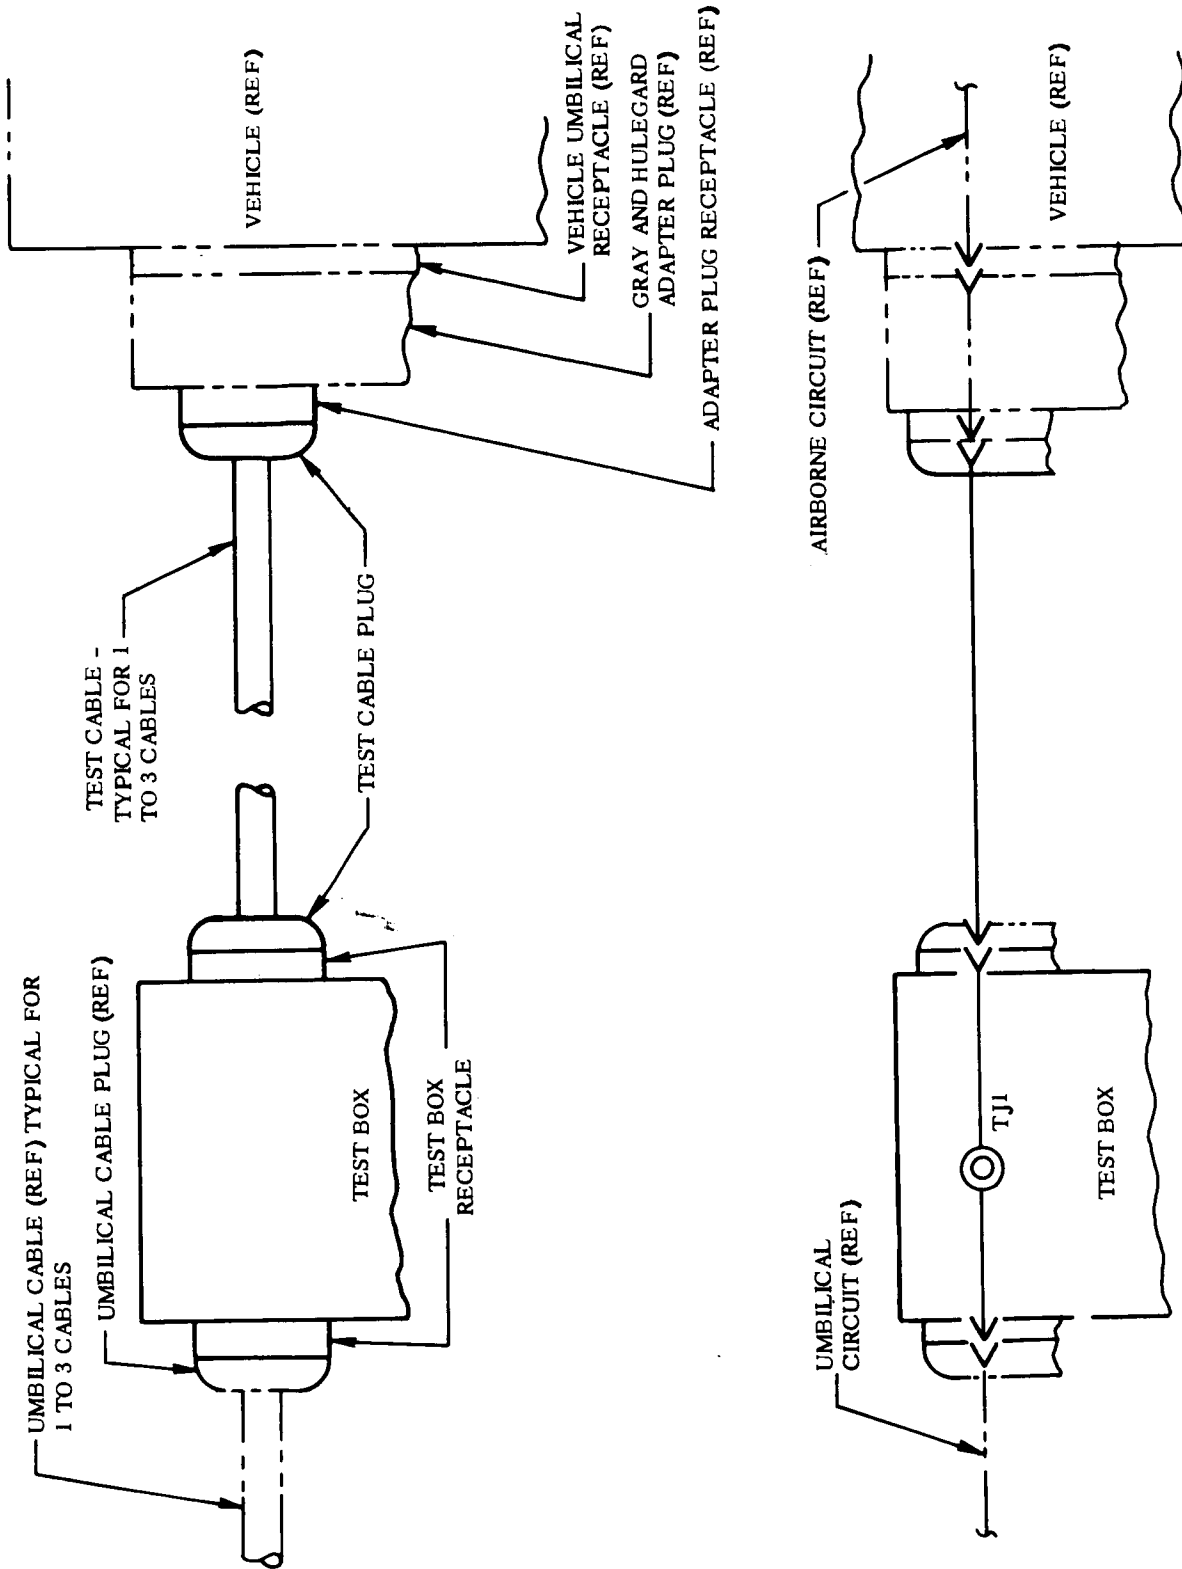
Typical Umbilical Access Test Box Installation and Circuit - Separate Test Cables
